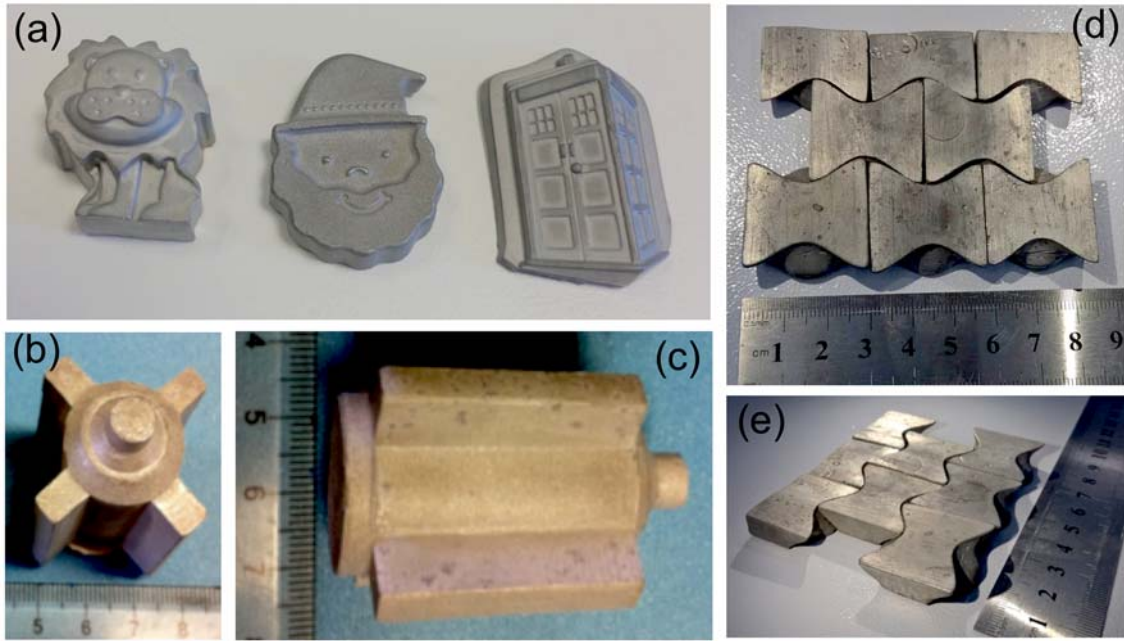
Complex-shaped ZrB_2 components produced by freeze casting. a) Novelty objects produced from soft rubber open-cavity molds filled at ambient temperature and frozen at -40°C . b) and c) The rotor-shaped objects were freeze cast in an aluminium close cavity mold pre-chilled to 0°C using suspensions containing 59 vol% solids. d) and e) Interlocking tiles molded in an aluminium open-cavity mold filled at ambient temperature with suspensions containing 59 vol% solids and frozen at -40°C . After firing at 2100°C in the Red Devil furnace, the parts had densities varying from 65% to 80% theoretical density.
